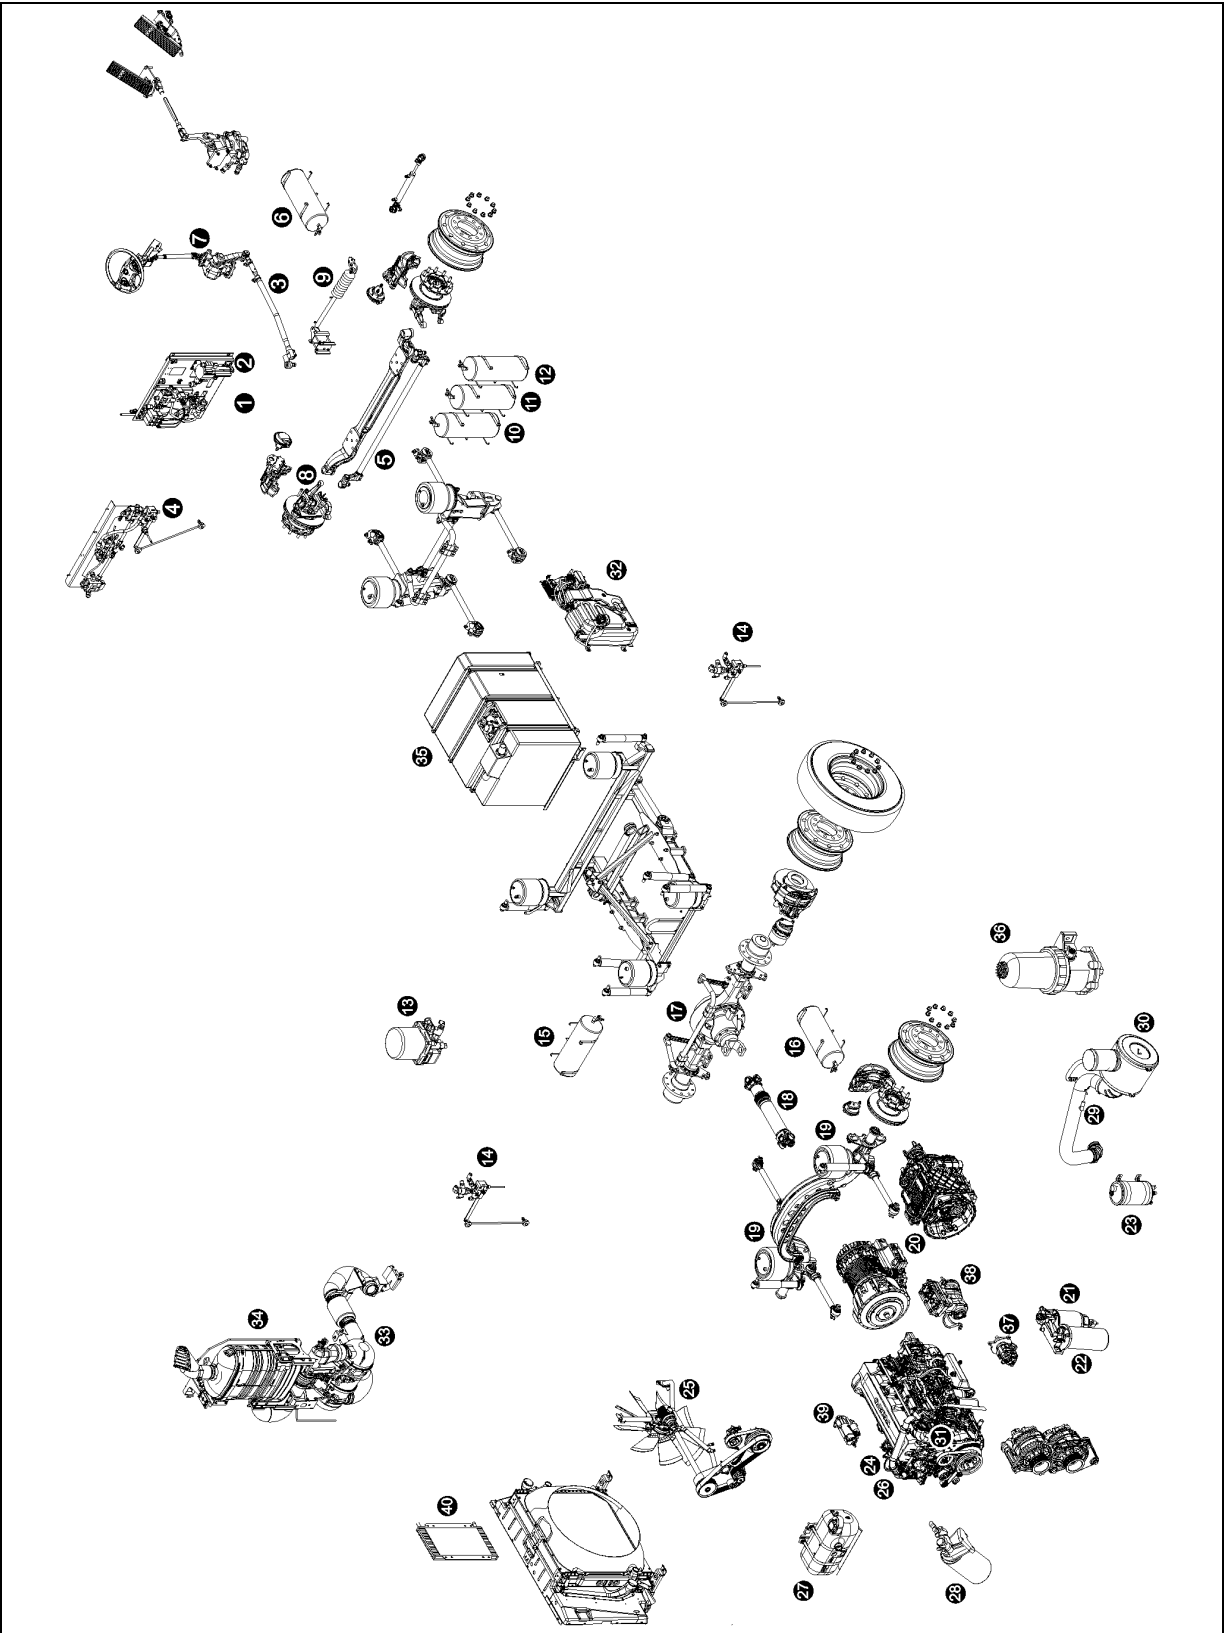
LUBRICATION AND SERVICING POINTS ON I-BEAM AXLE FRONT SUSPENSION VEHICLES 24030\_1
